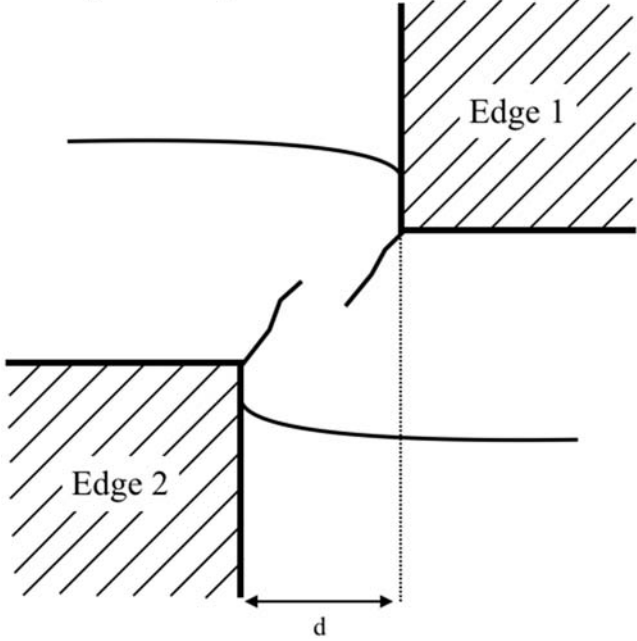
With a large clearance between the shear edges, the fractures won't meet up and this will result in worse cut quality.
